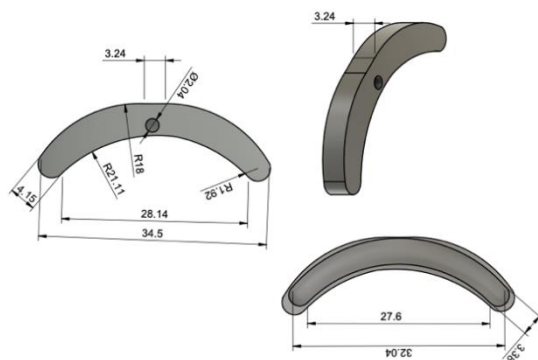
The eyelid fasteners CAD model illustrating the design and dimensions.
